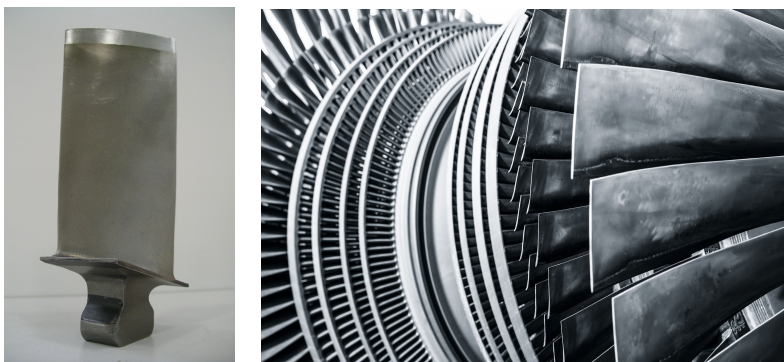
A single metal blade (left) and blades installed on steam turbine (right)
